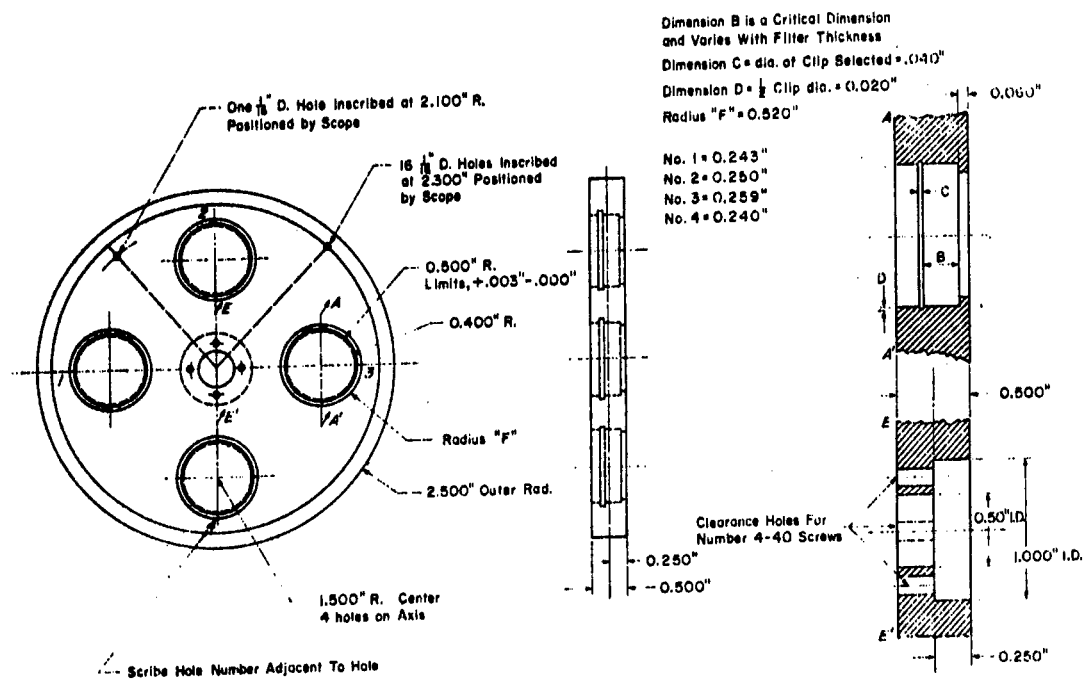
DETAILS OF ROTATING FILTER WHEEL
